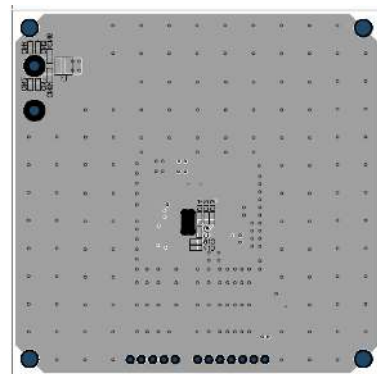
Recommended PCB Layout for the QFN-24 Package ⁽¹⁰⁾
